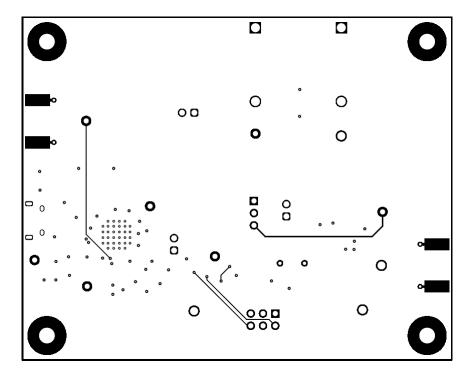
DAC121S101SEPEVM PCB Bottom Layer Layout
